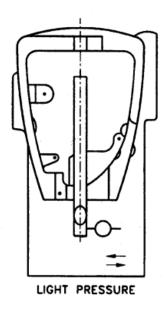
B Assembly Clearance for Needle Bar in the Direction of Right Angle to the Motion
